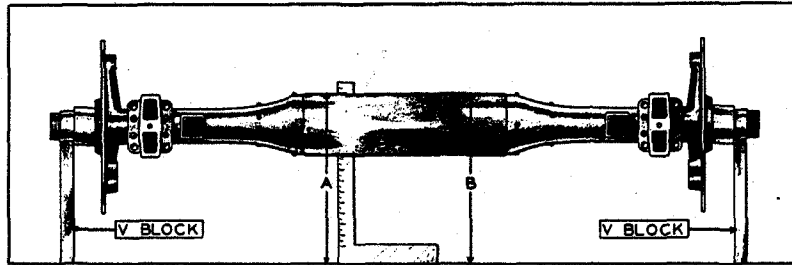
Rear Axle Housing Being Tested for Alignment—1st Position
